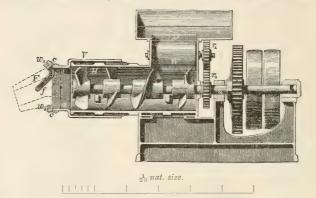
Older form of Schlickeysen's horizontal peat machine, with feeding roller.
